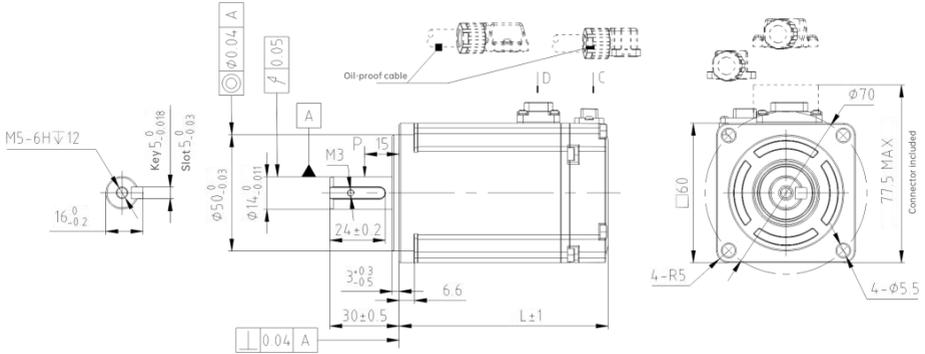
Dimensions for 60 frame medium inertia straight plug economical servo motor (ST4-L series)
